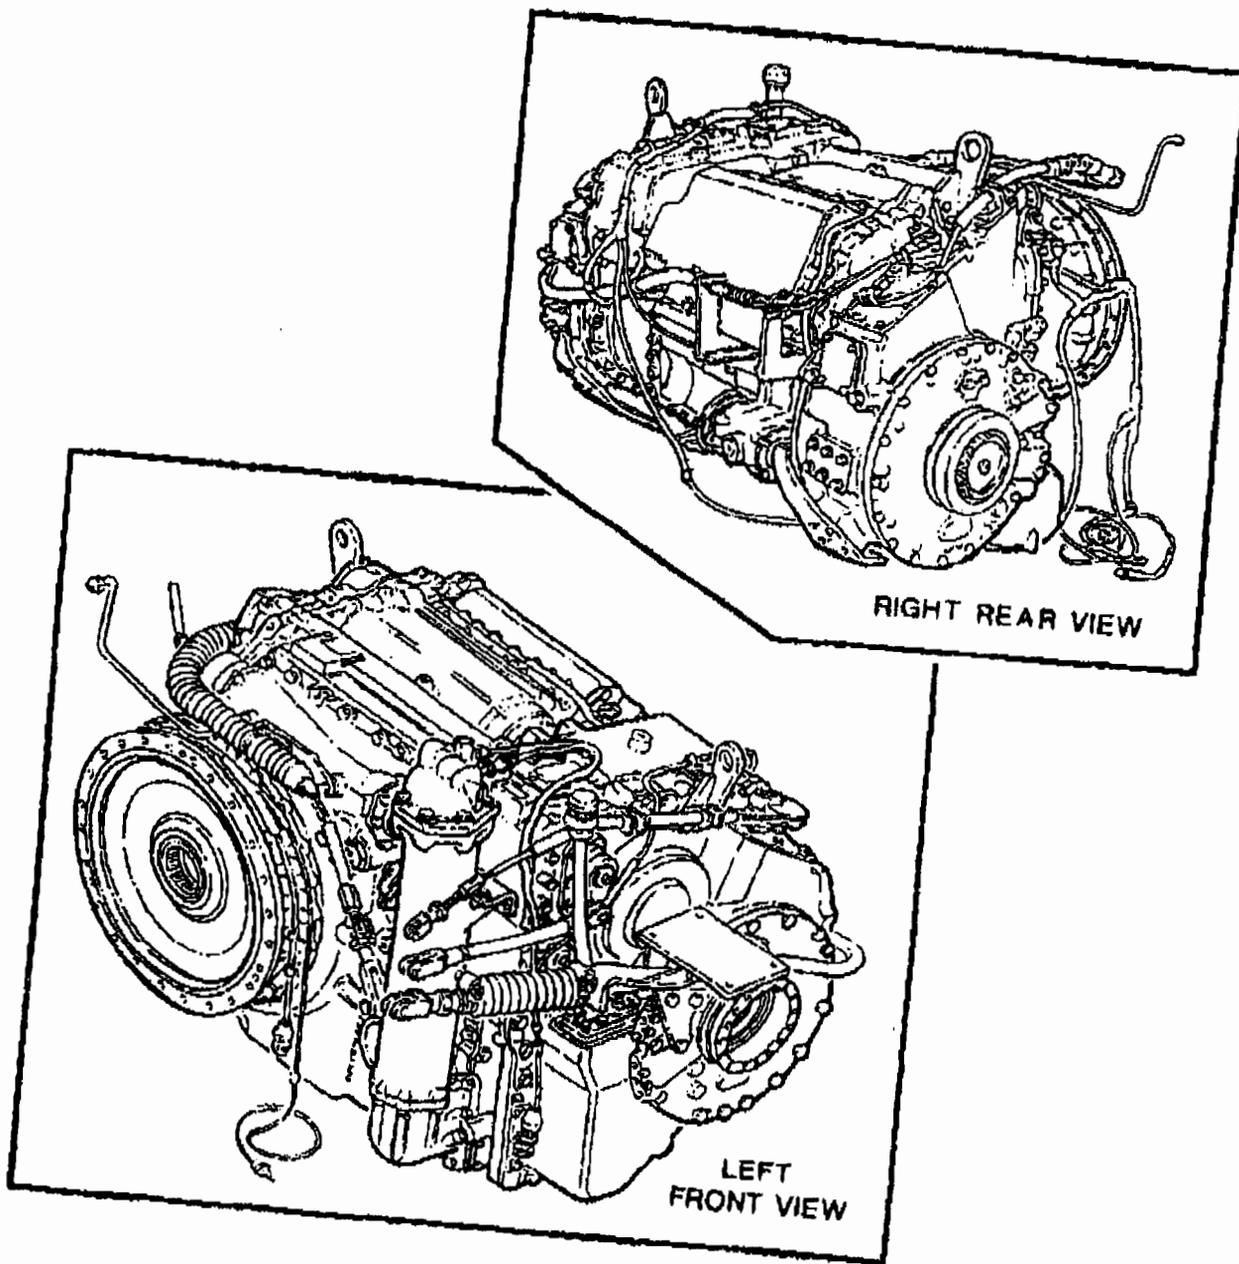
Transmission Assembly (SIN 3746 thru 11444) and (SIN 610U thru 3027U) - Overall View
